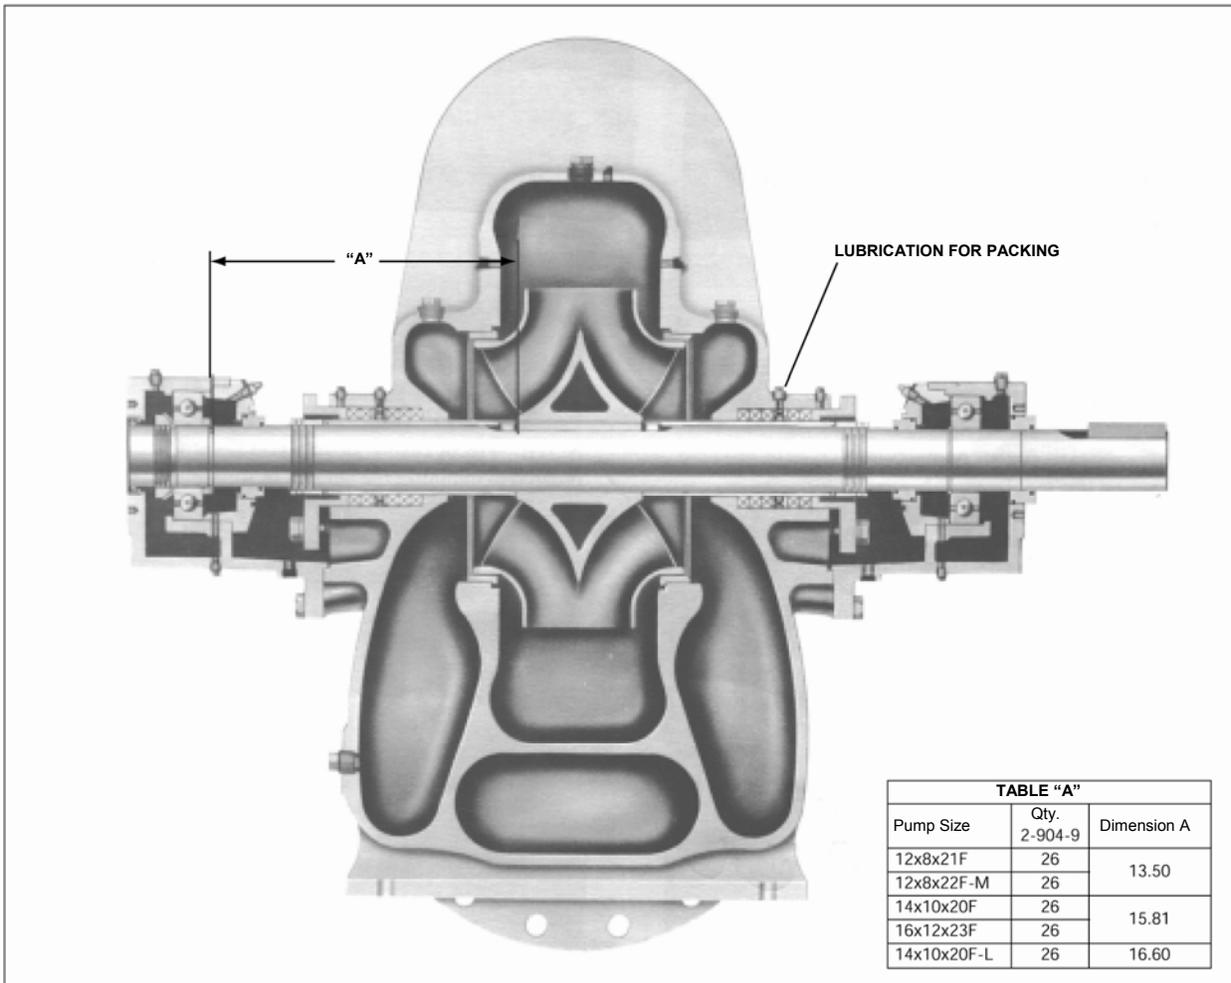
ASSEMBLY SECTION: PUMP WITH PACKING
